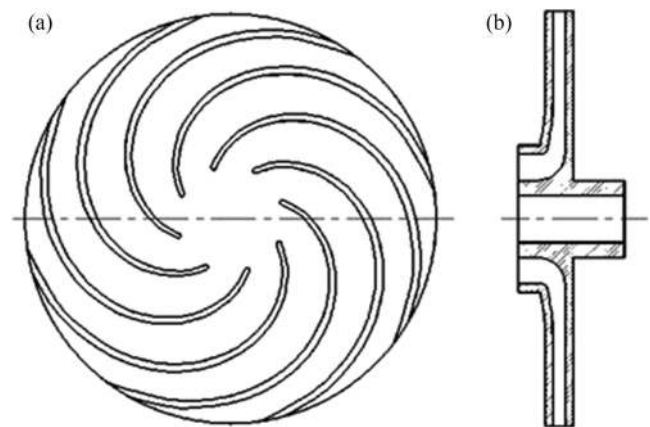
Two-dimensional view of the impeller: (a) plane projection; (b) axial projection (8 blades).
